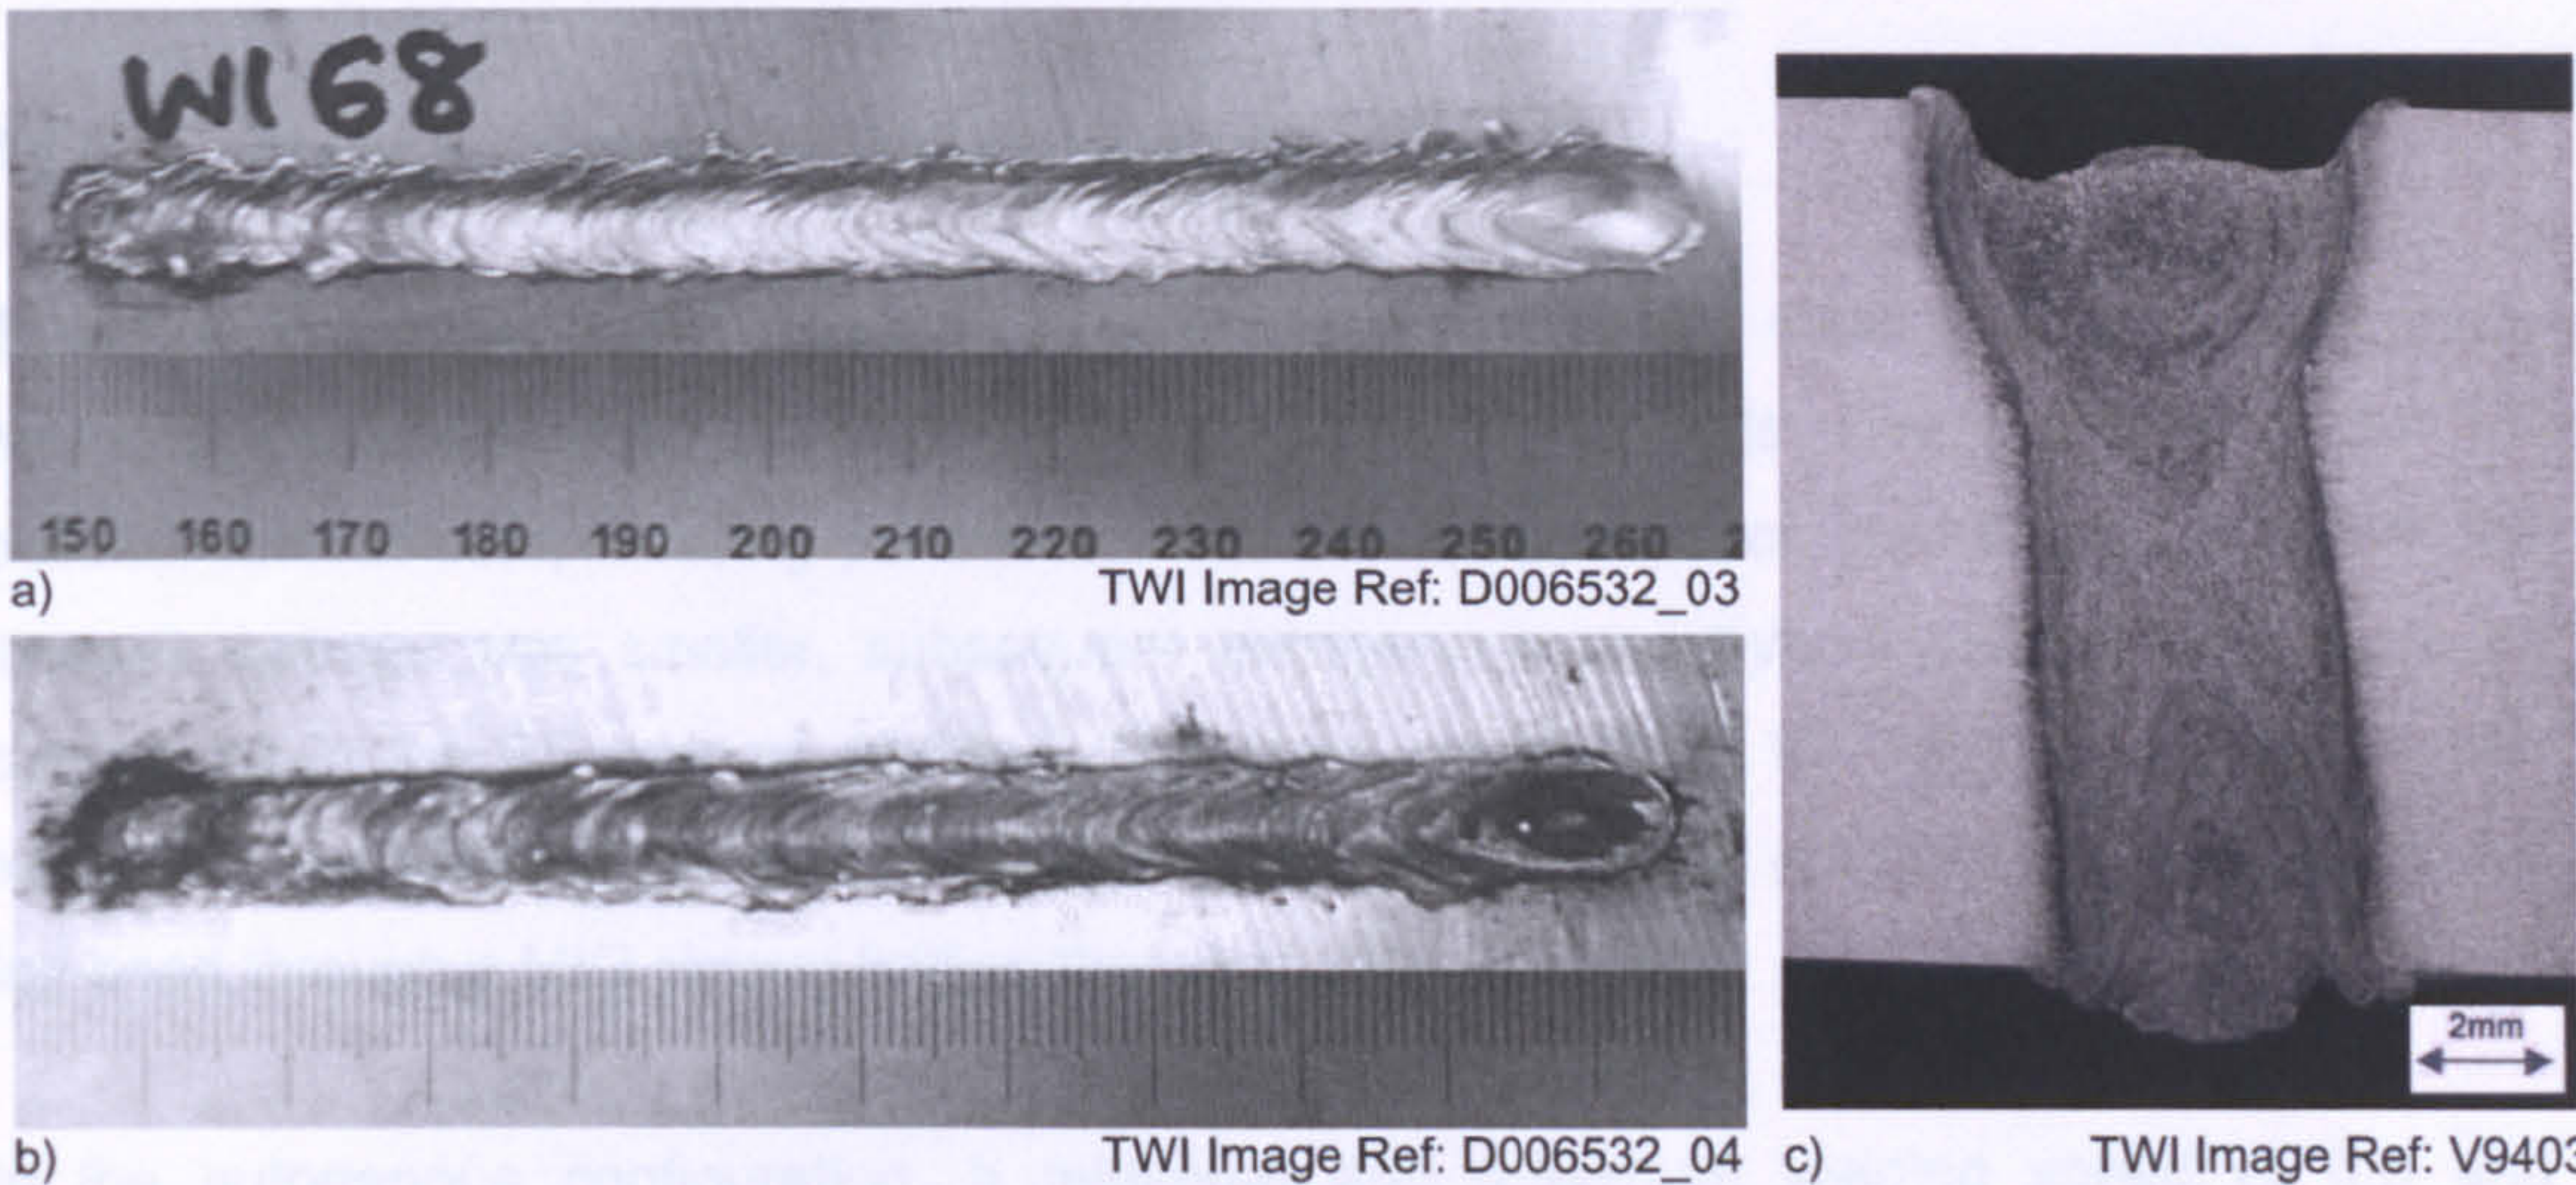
A fully penetrating melt run produced in the PC welding position in 12.7mm thickness 7xxx aluminium using 7kW of Yb-fibre laser power focused in a 0.6mm spot at a welding speed of 0.5/min:
